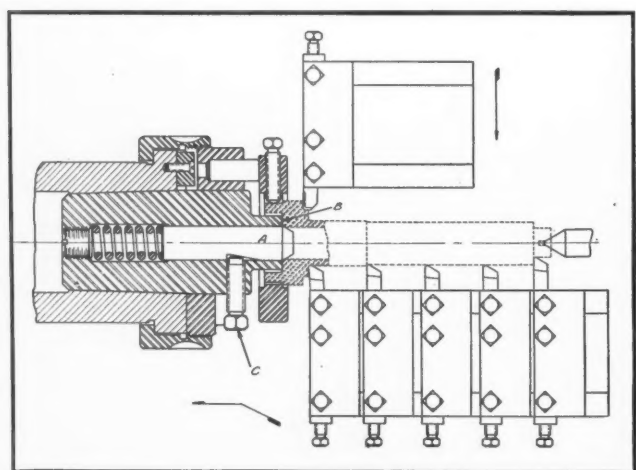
Tool Set-up used in rough-turning Transmission Clutch Shaft
